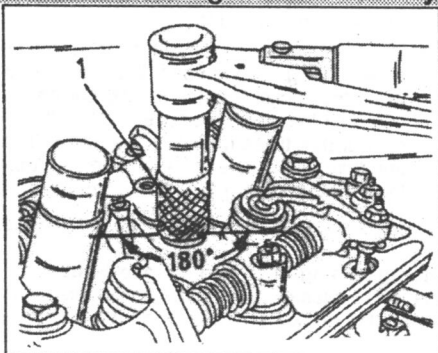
Angle-tightening the cylinder head bolts when the angle is 180°. The socket (1) must be marked as shown.
